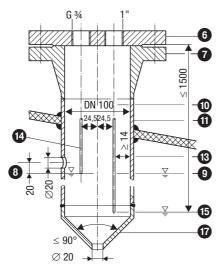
Protection tube (provided on site) for installation inside the boiler and in combination with other GESTRA equipment
